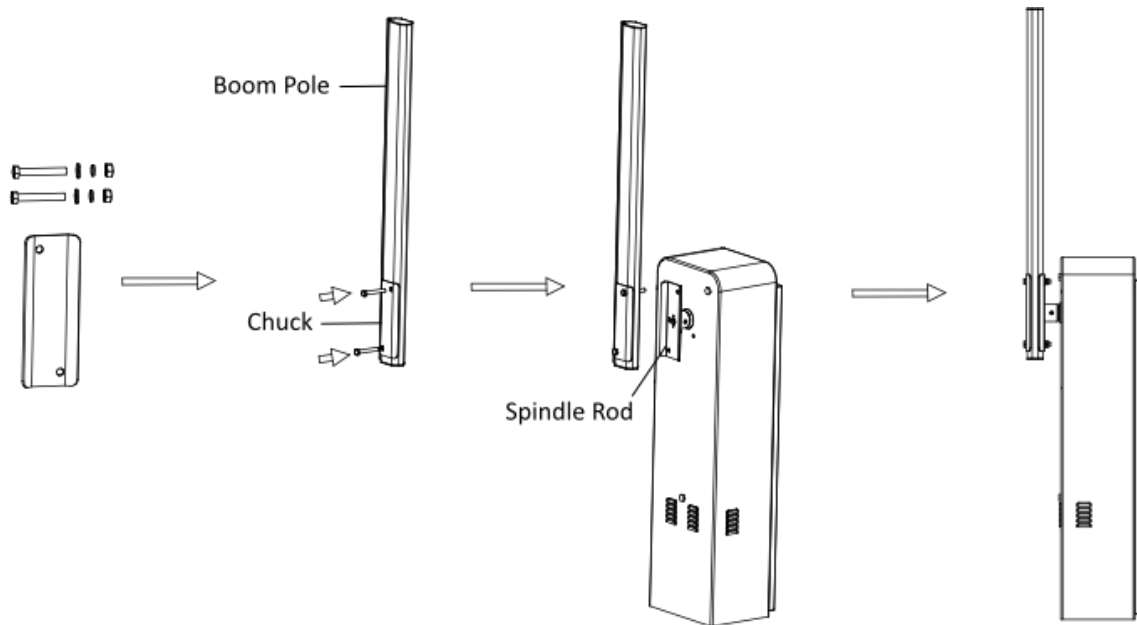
Install Chuck and Boom Pole to Spindle Rod
